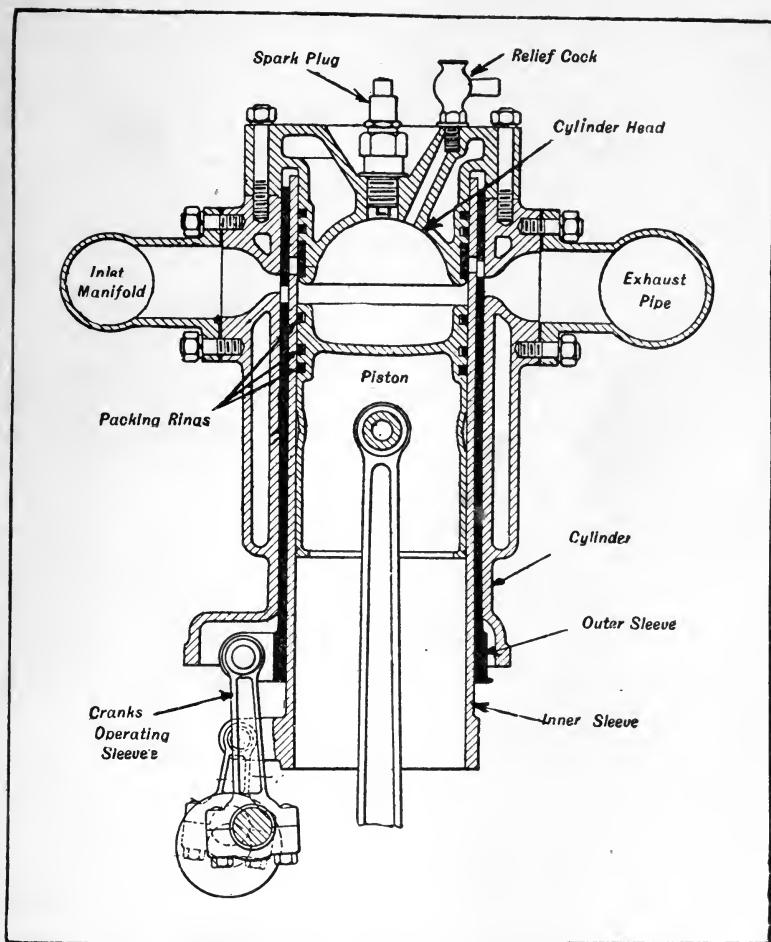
Section Through Cylinder of Knight Motor, Showing Important Parts of Valve Motion.
